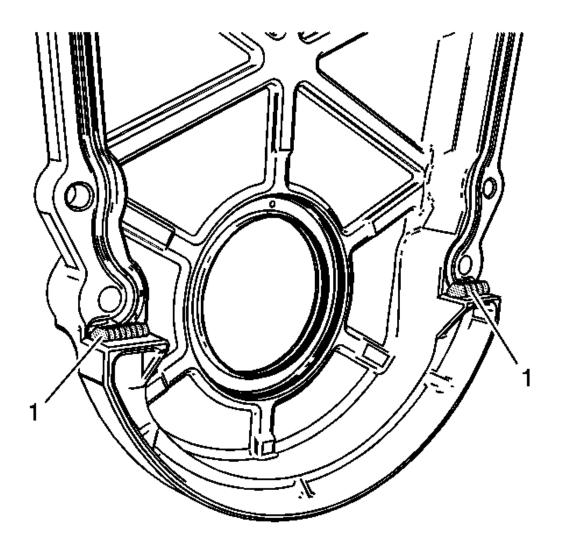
Applying Sealant At Sealant Points On Engine Block Courtesy of GENERAL MOTORS CORP.
